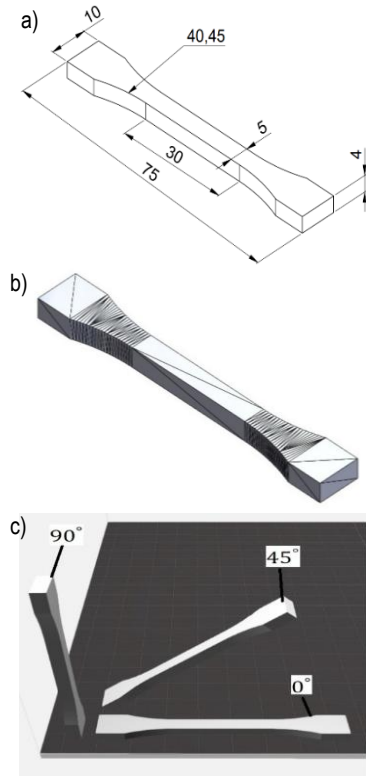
Test specimens: a) dimensions, b) STL saving, c) print orientation
